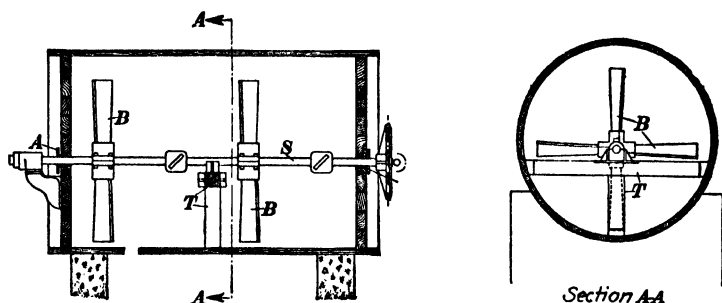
A, packing; B, agitator paddles; S, agitator shaft; T, inside bearing support.
